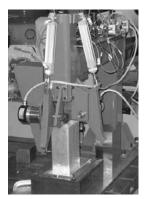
Laboratory version of the complete welding jig with one work piece in position ready for clamping.
